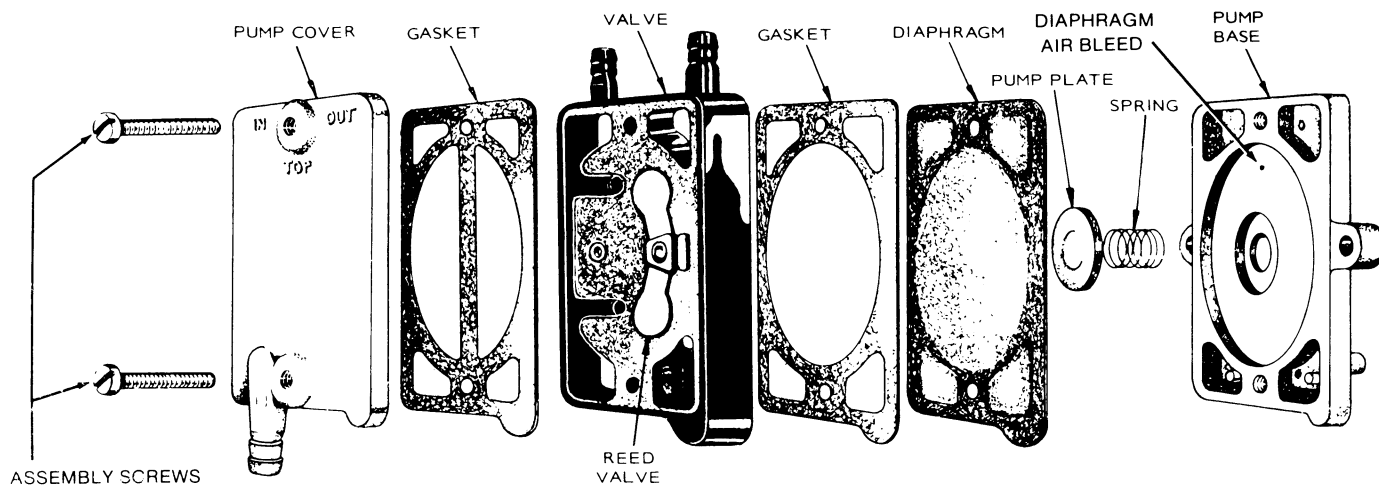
EXPLODED VIEW OF FUEL PUMP
